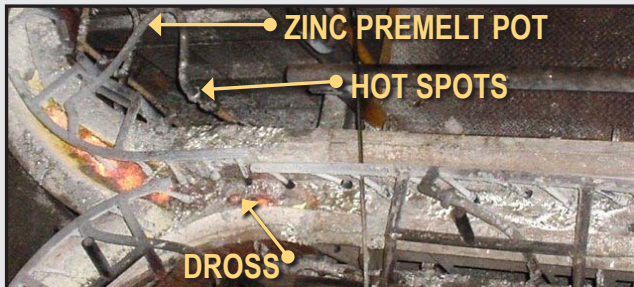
Traditional launder with gas burners showing hot spots and dross build up
